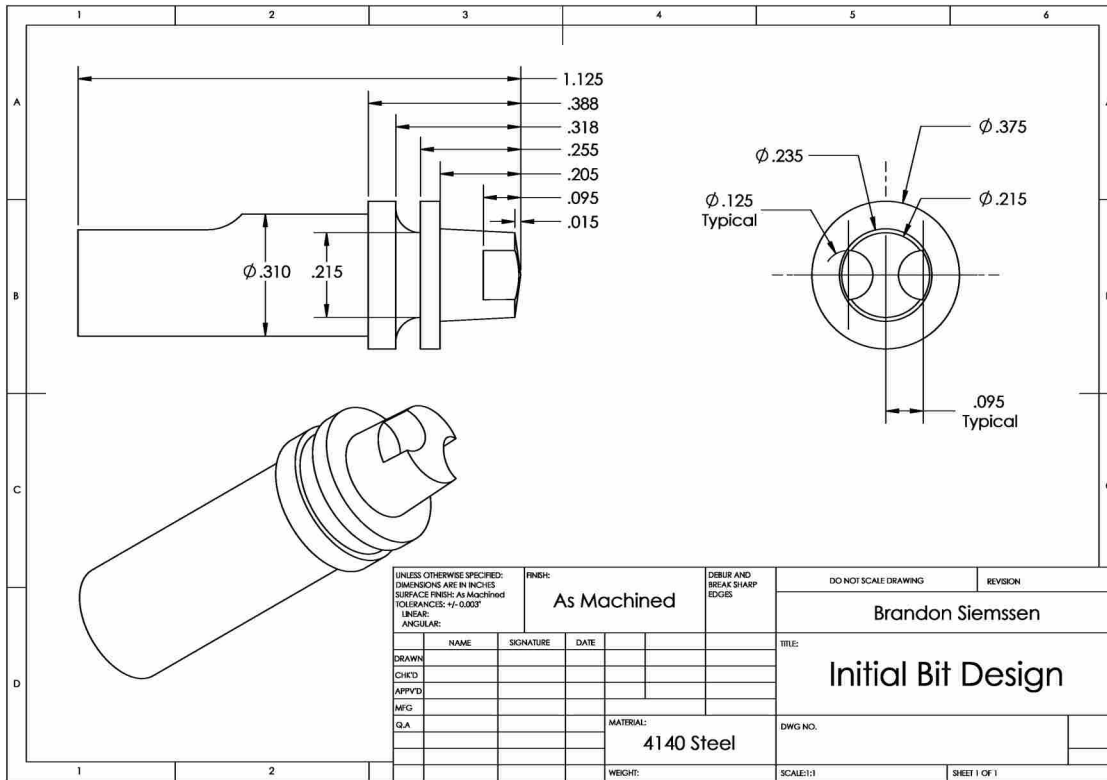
CAD drawing of the initial bit design to be machined on the Okuma CNC lathe
